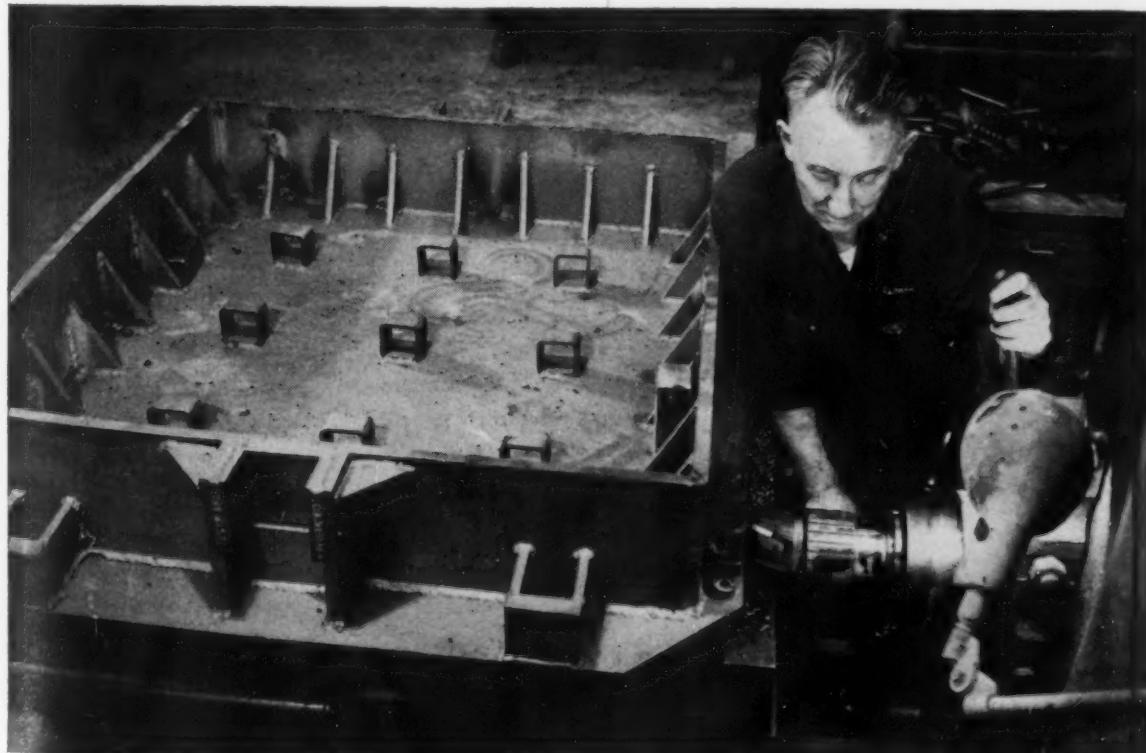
Typical fabricated metal box used to hold a large plastic die. Walls are welded boiler plate, re-inforced with
